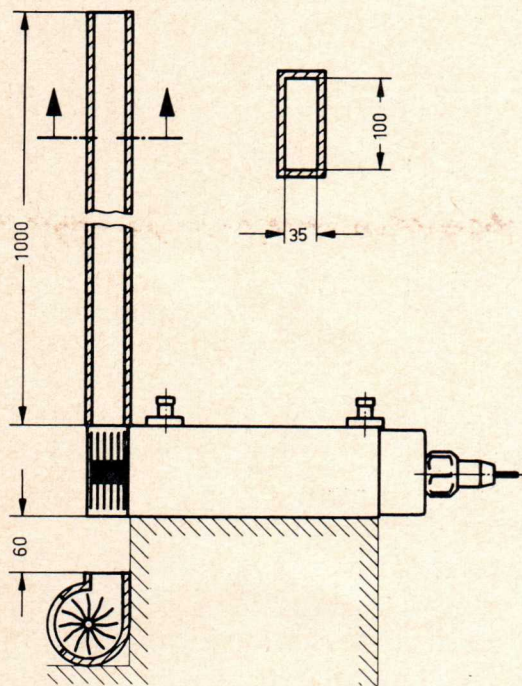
The magnet system RW 21 with convection-cooling assembly blower and chimney combined
